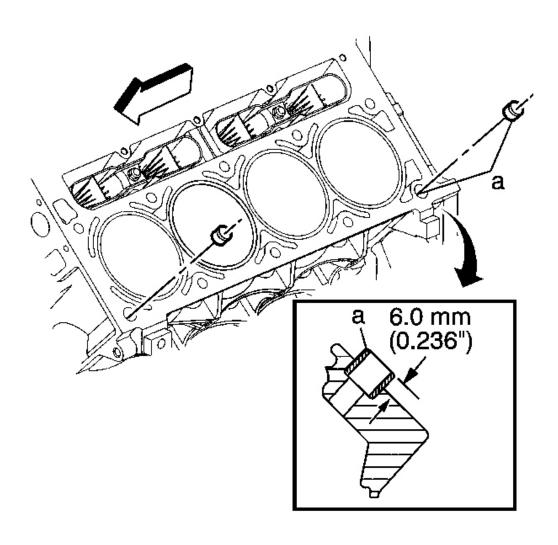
Identifying Cylinder Head Locating Pins Installation Position Courtesy of GENERAL MOTORS CORP.
